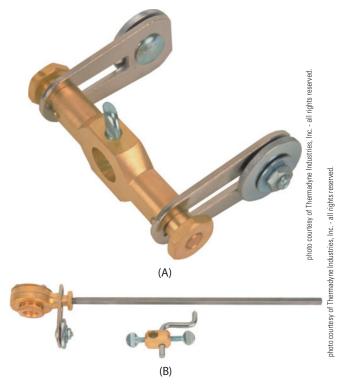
Devices that attach to the cutting tip to improve hand cutting. (A) Straight cutting. (B) Hole or circle cutting.
